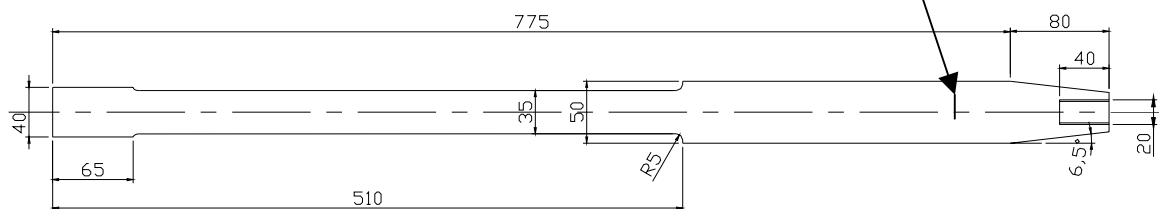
Drawing of the cantilever specimen with wire cut slit
